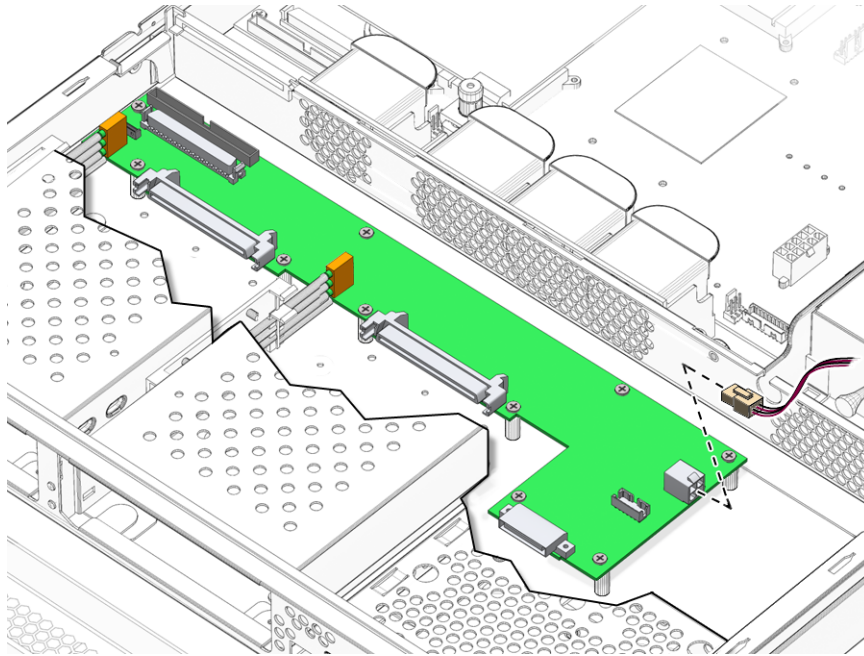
Lower Interface Board Standoff and Screw Locations
